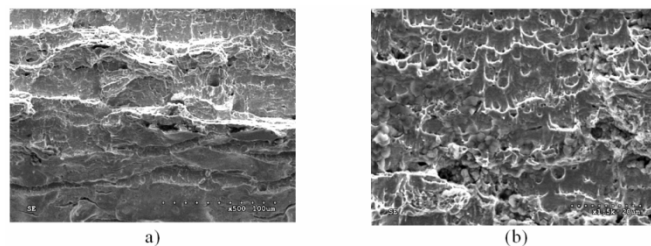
(a) Micro cracks at the notch bottom as source of fracture initiation for test in hydrogen. (b) fracture character at the inner surface.
